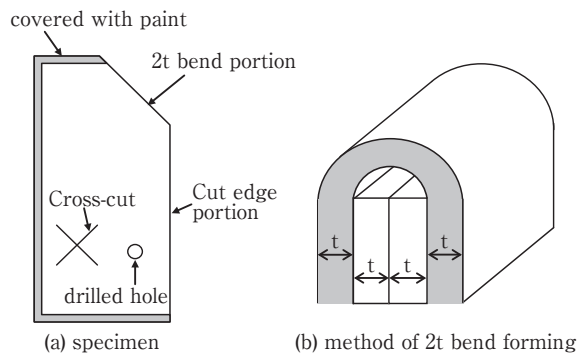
Scheme of the (a) specimen and the (b) method of 2t bend forming.
